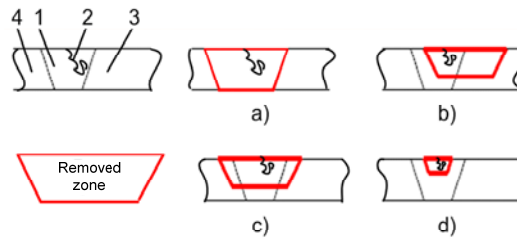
Ways of removing of the area with defect: a) total removal of the damaged area; b) partial removal of the area with defect from base material MB2; c) partial removal of the area with defect, on the surface from MB 1, C, MB2; d) partial removal of the area with defect, from C.
